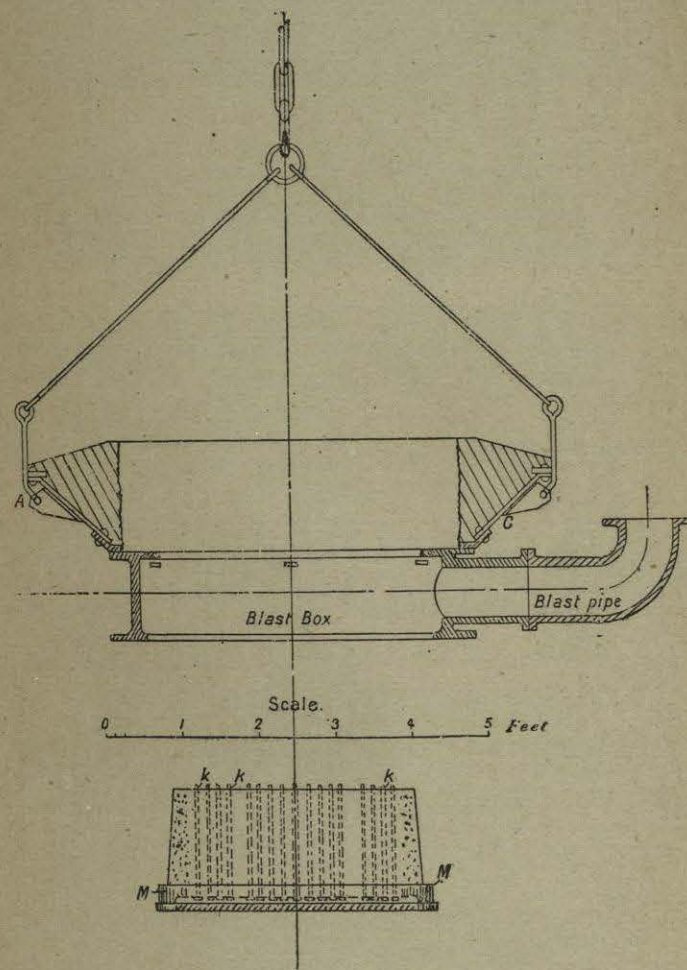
Sketch showing method of inserting rammed baked twyer plug in bottom section of the converter.
